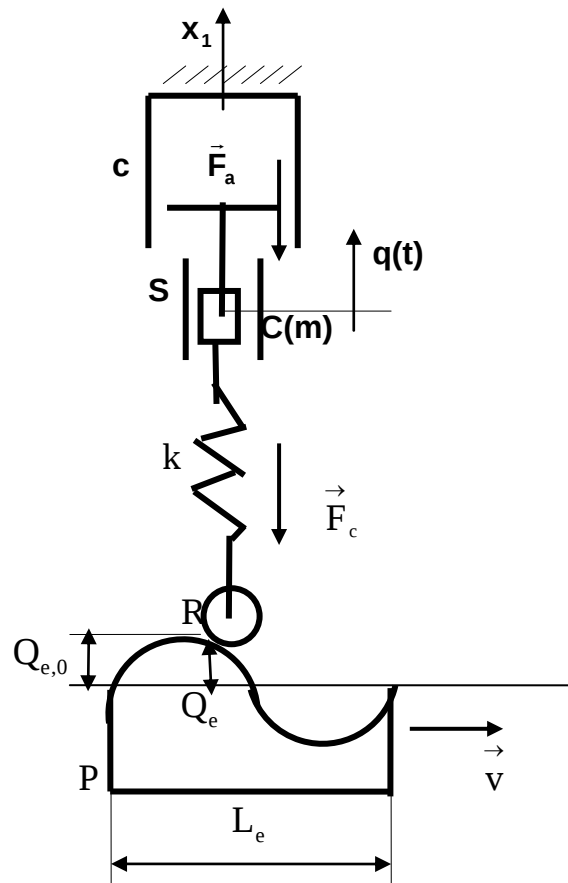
The mechanical model of the hydraulic duplicating attachment
